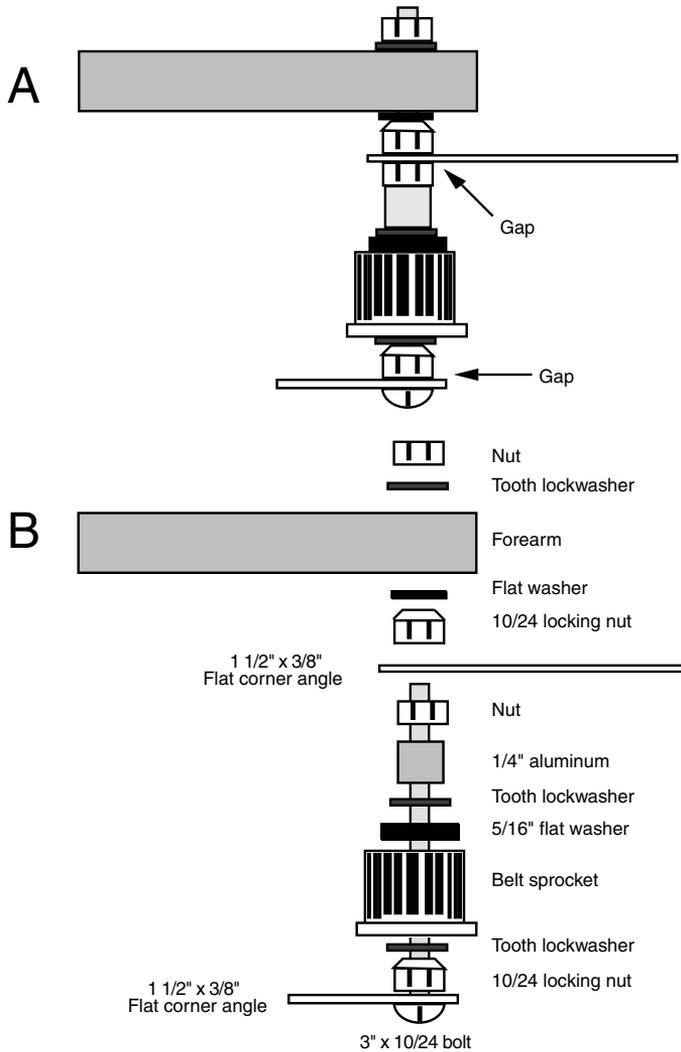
Upper arm elbow joint detail. *a.* Complete joint; *b.* Exploded view.
